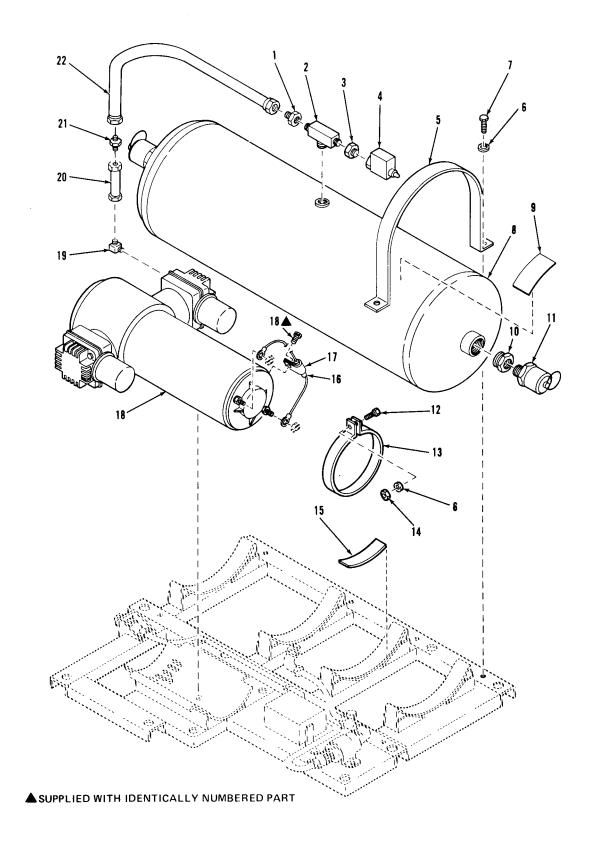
Air Compressor Assembly (Sheet 1 of 2)
